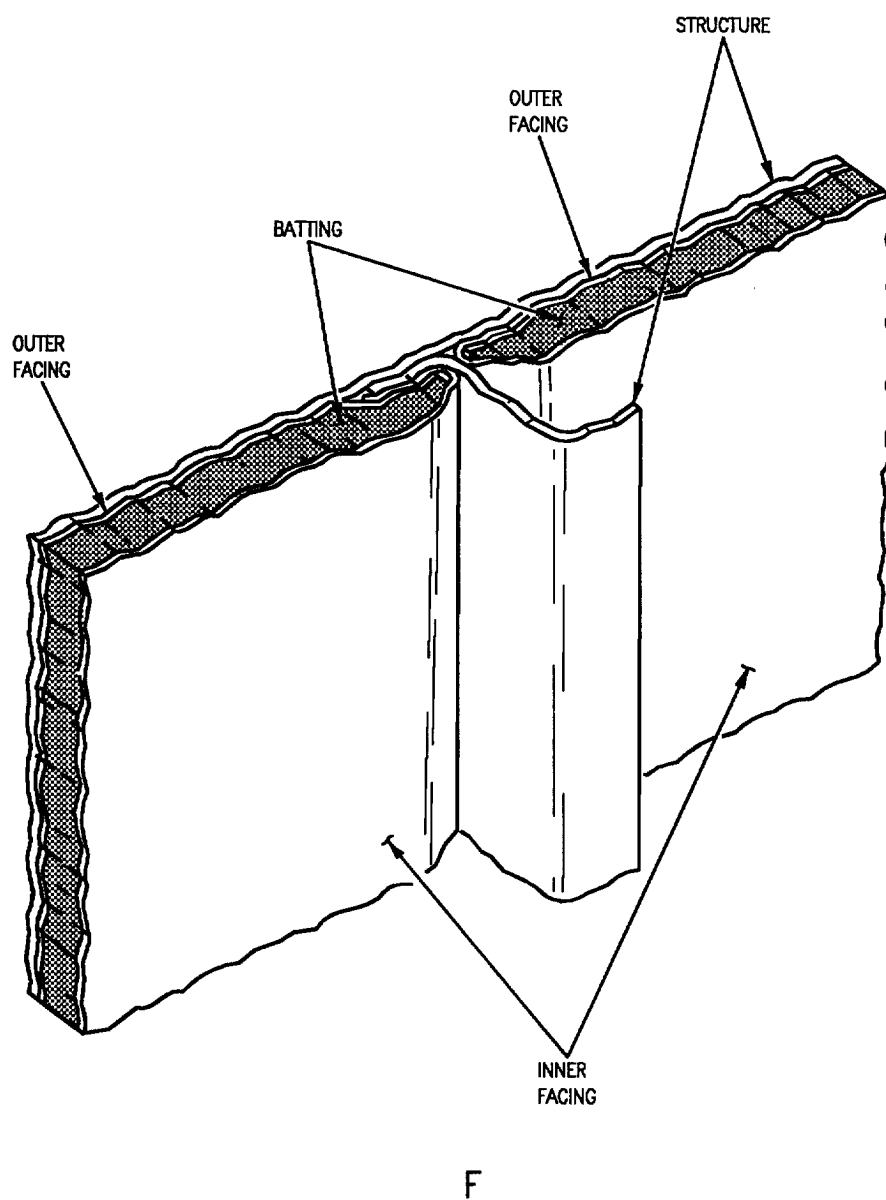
74A800664 Blanket Replacement (Sheet 3)
